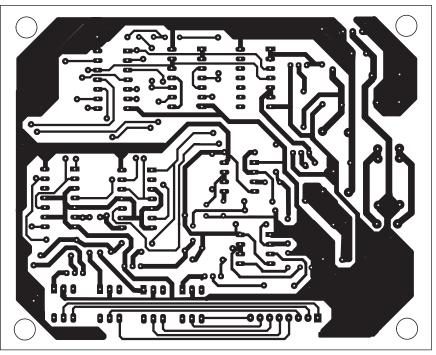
Actual-size, single-side PCB for bidirectional visitor counter
